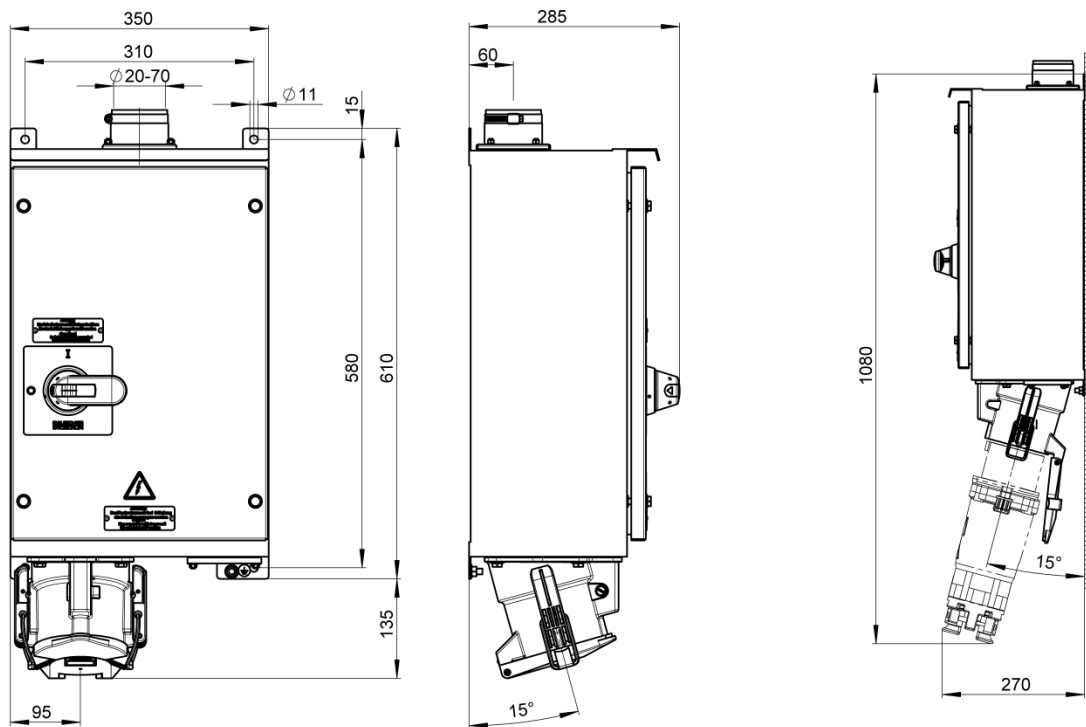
Dimensions Connector Unit with mechanical interlock CUMI C-Line (200A – 250 A) in mm
